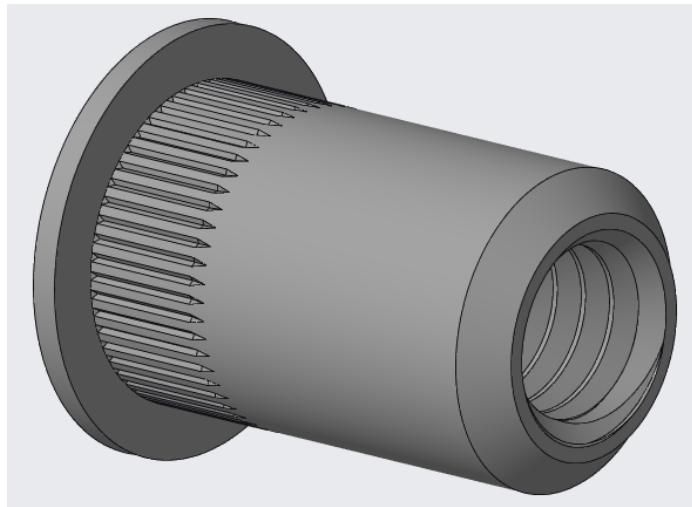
Model of M6 Rivet Nut Insert in Creo
